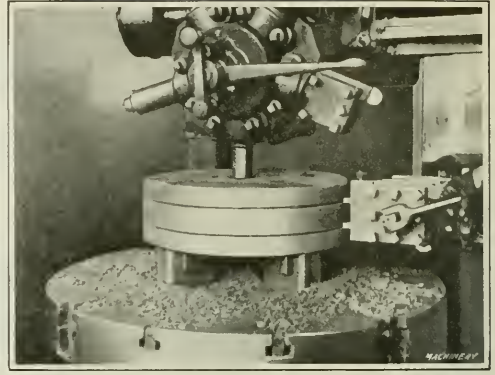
Piston-ring Groove Turning Operation, in which Two Tools are used in the Side-head Turret
